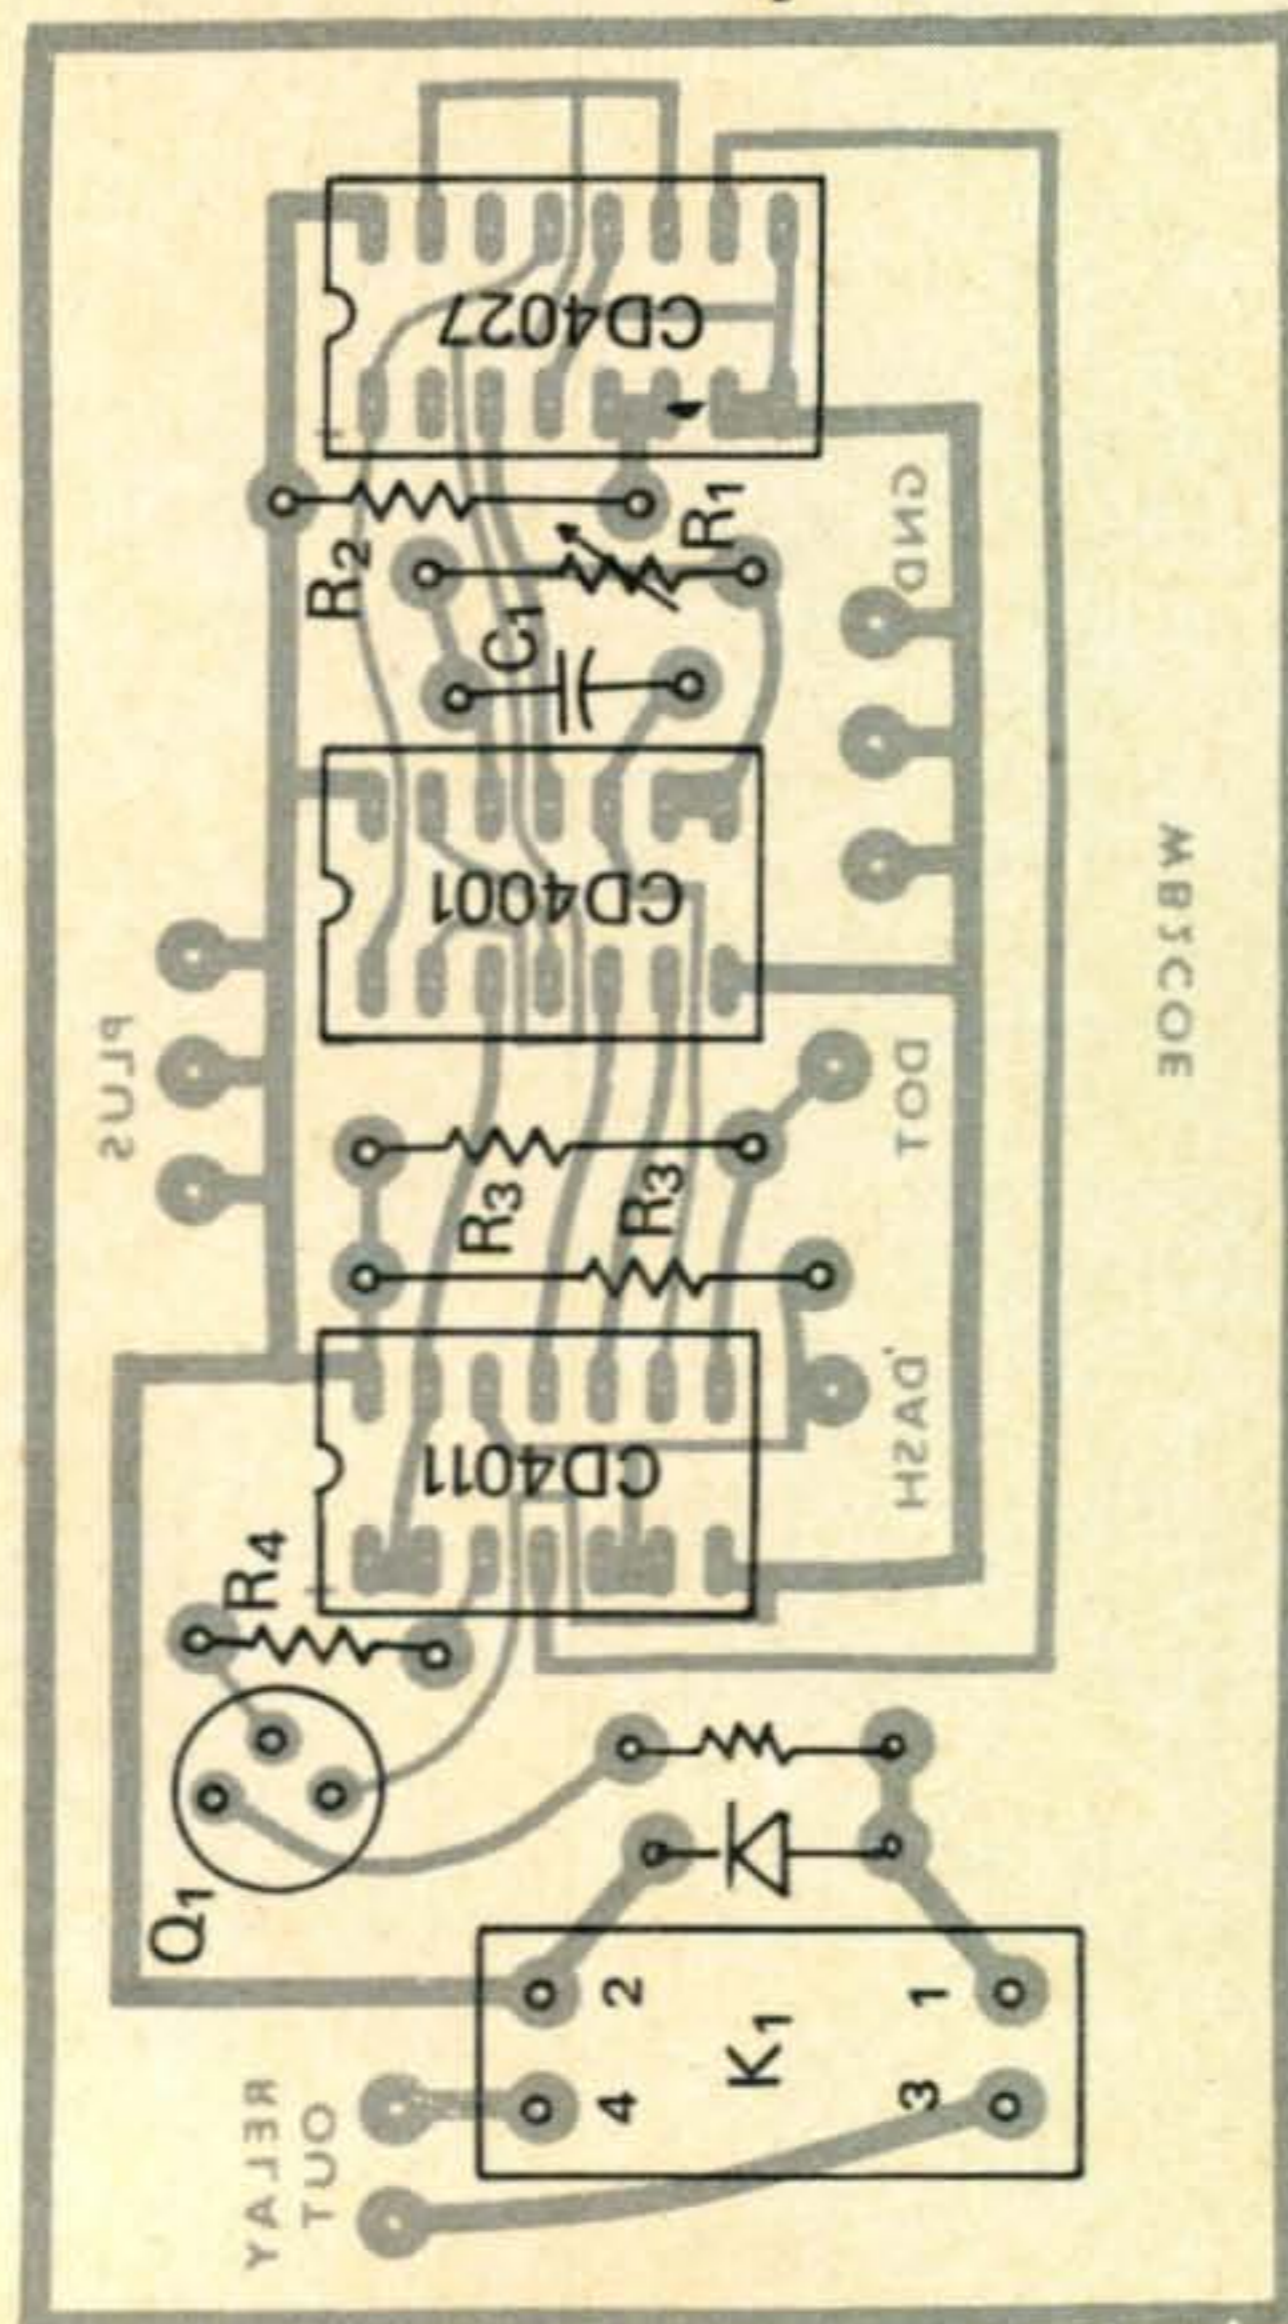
B—Full-size parts layout for the Version I keyer, shown from the component side.
